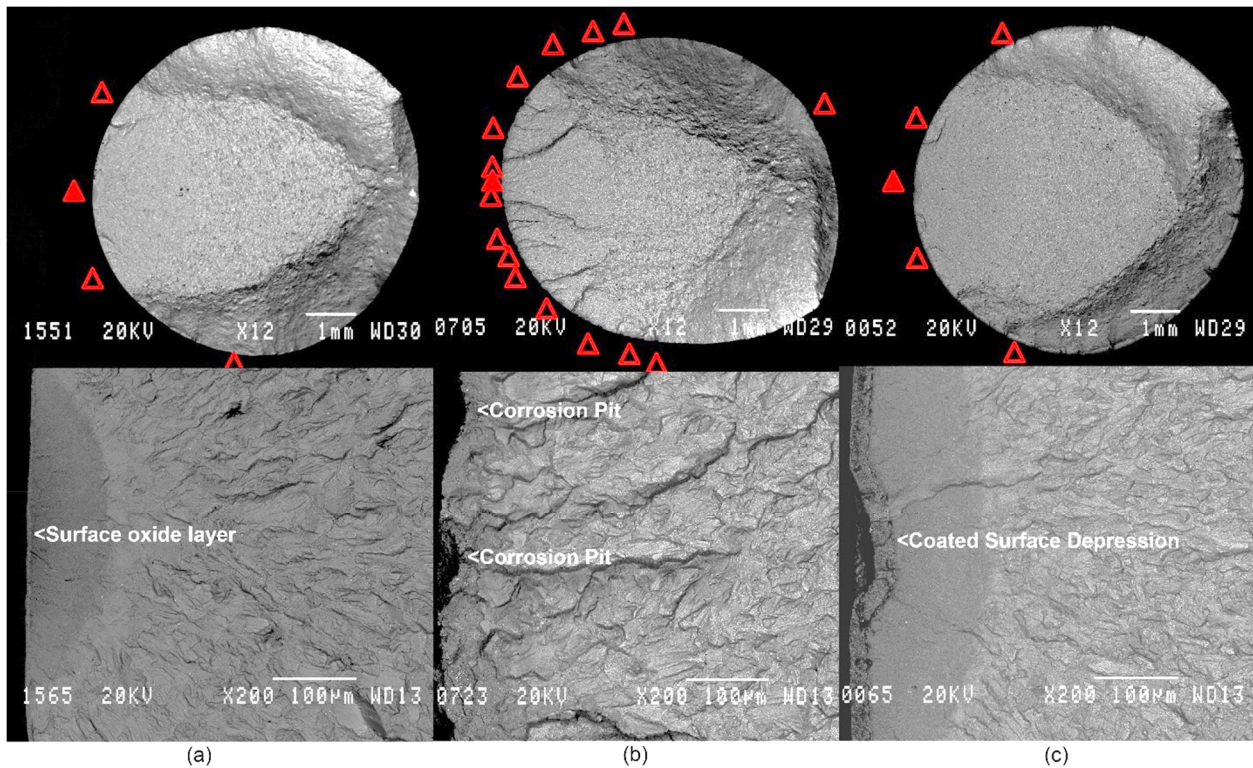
Typical fracture surface - failure initiation points for exposed fatigue specimens: (a) uncoated, oxidized 500 h at 760 °C, (b) uncoated, hot corroded 50 h at 760 °C, and (c) coated, oxidized and hot corroded at 760 °C. Uncoated specimens after exposures had surface-initiated failures from surface oxides and corrosion pits, while the coating prevented pits from exposing the superalloy and initiating fatigue cracks.
